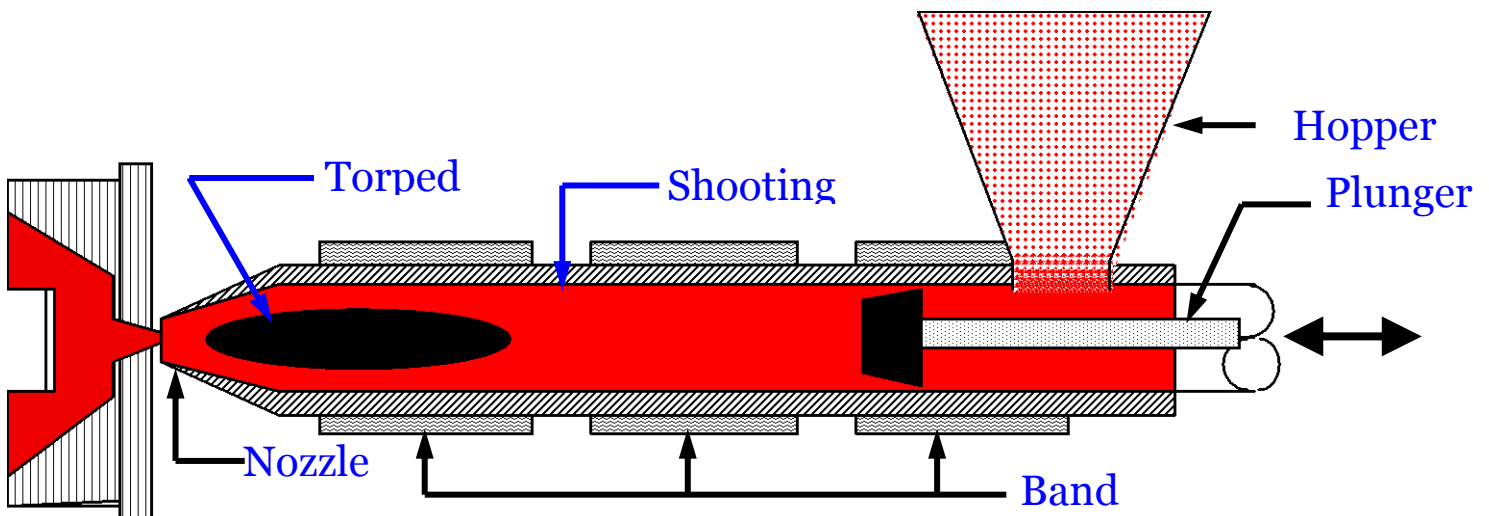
Schematic view of Plunger type Injection Molding Machine
